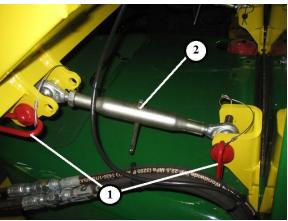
Hopper Frame Securement Key 1 – Pins Key 2 – Turn Handle
